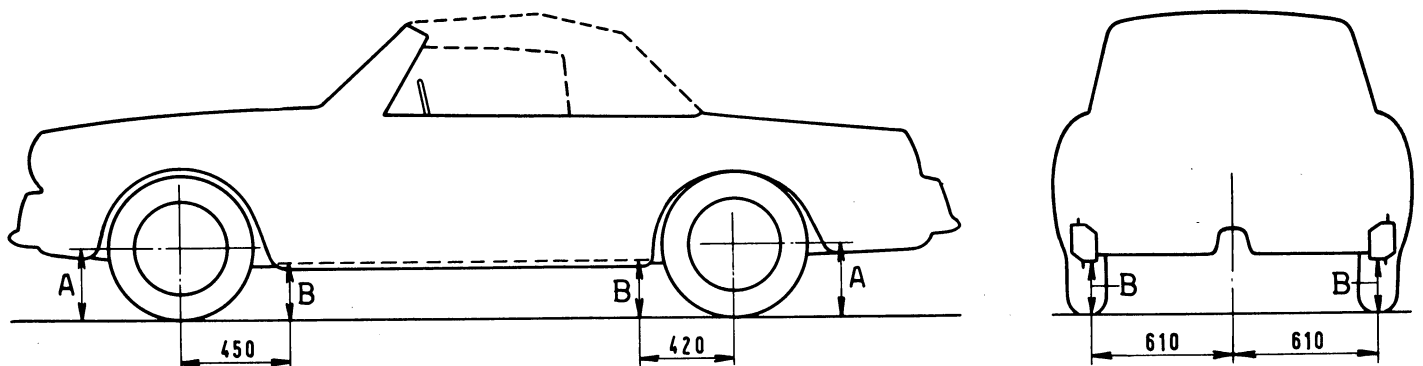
Trim diagram of vehicle under « static load » for checking front end geometry.
